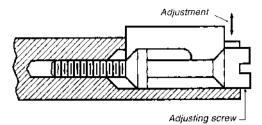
Nested slides can provide an extension for a machine-tool table or other structure where accurate construction is necessary. In this design, adjustments to obtain smooth sliding must be made first before the table surface is leveled.
